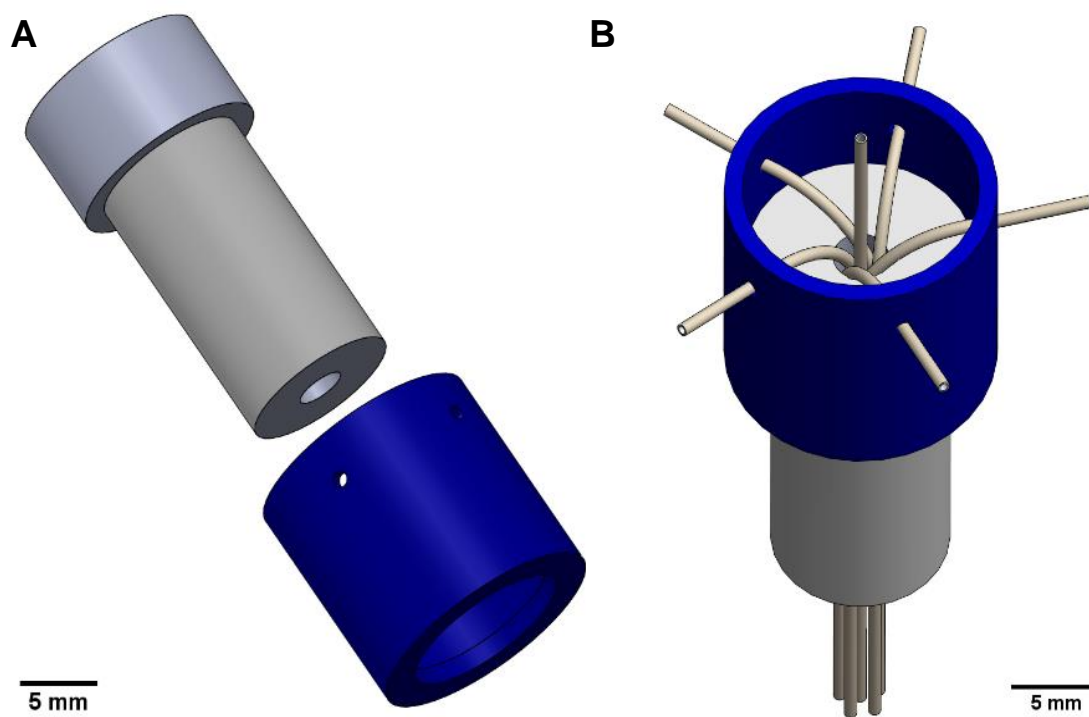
A) Drawing of the two components of the fixture for manufacturing the cannula of the arborizing catheter. B) View of assembled fixture holding and bending the PEEK tubing in place for bonding.
